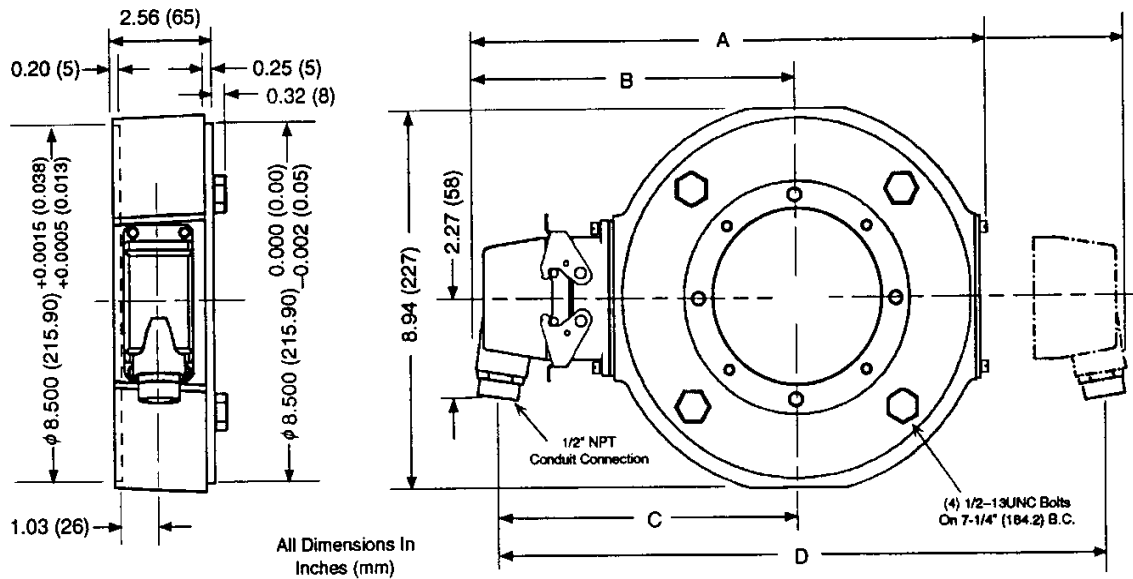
RIM Tach™ 8500 Thru-Shaft Pulse Wheel Physical Dimensions
